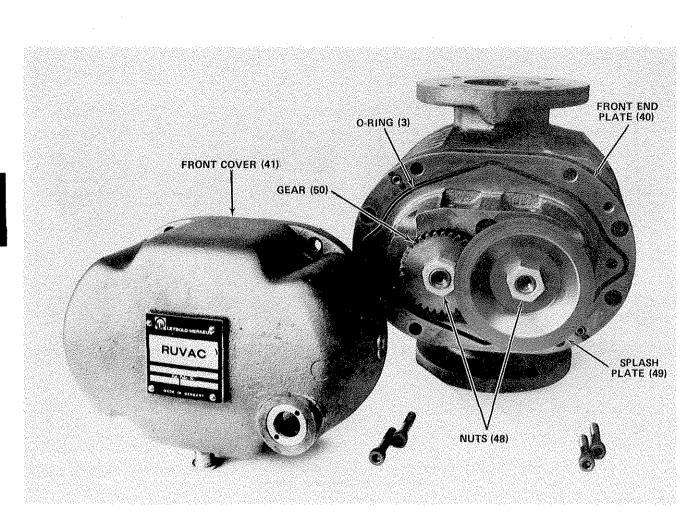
Front Cover Removed from the Pump (WA-250 pump model shown).
